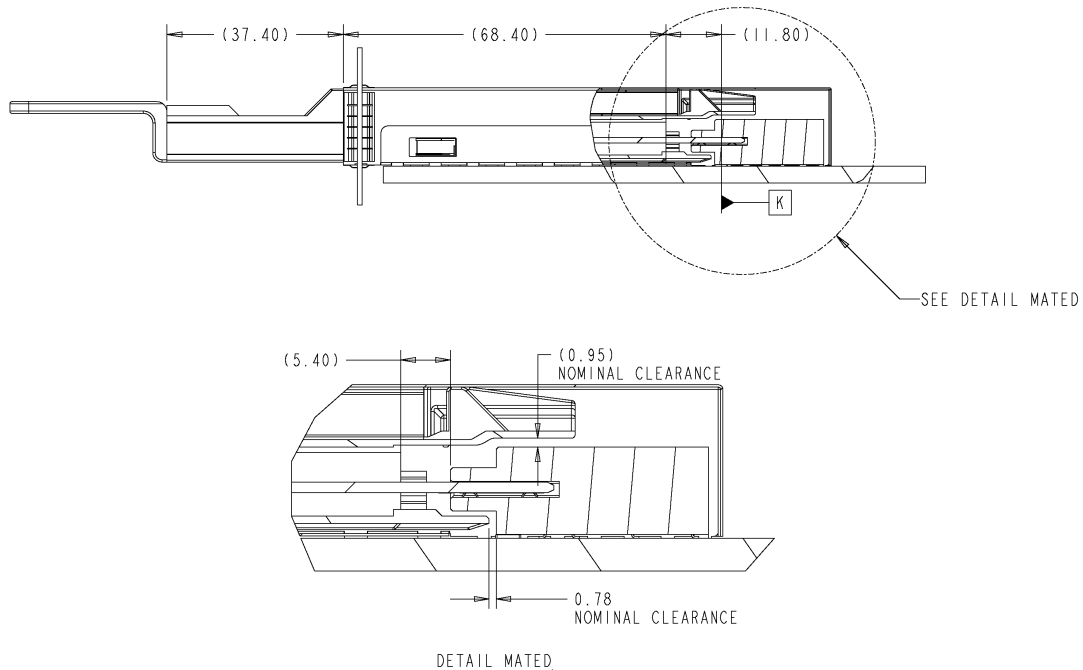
Side view of a 1x1 cage with axial reference dimensions
